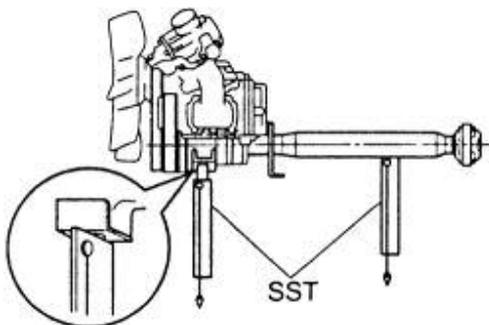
Use an angle gage to measure the installation angle of the driveshaft in the front and behind the coupling
